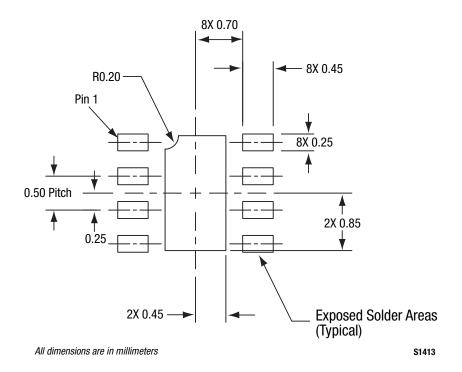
SKY67022-396LF PCB Layout Footprint (Top View)
